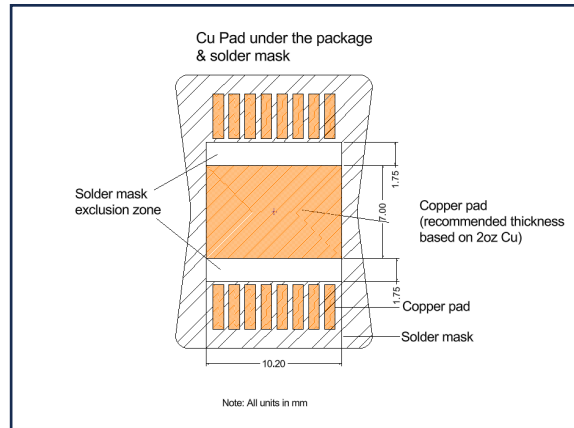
Recommended Land Pad Layout with Cu pad under the package
